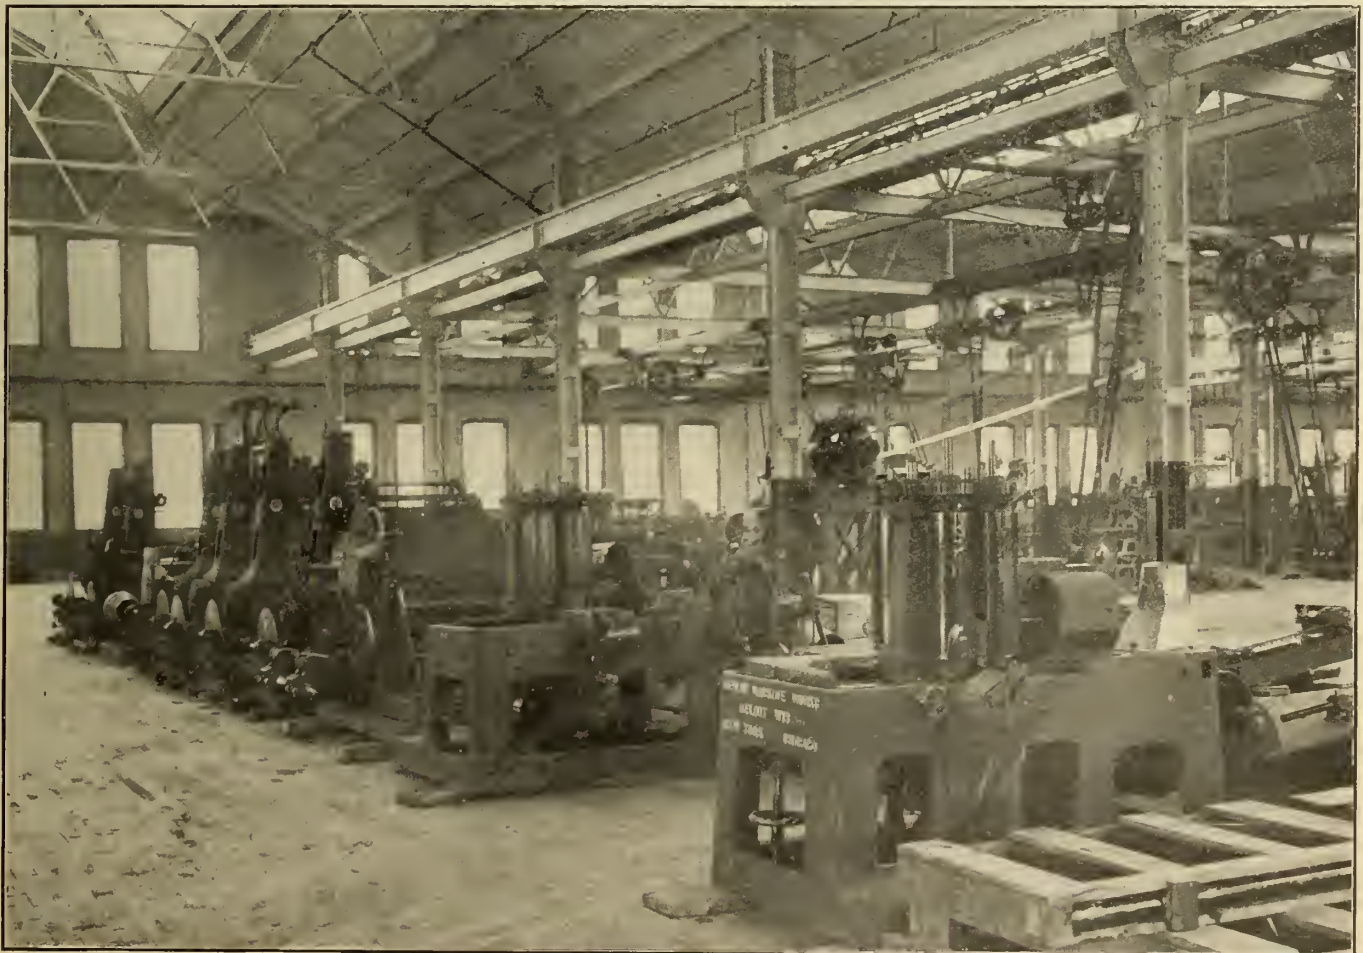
Machines Ready for Shipment. This View Also Shows the Building Construction.
